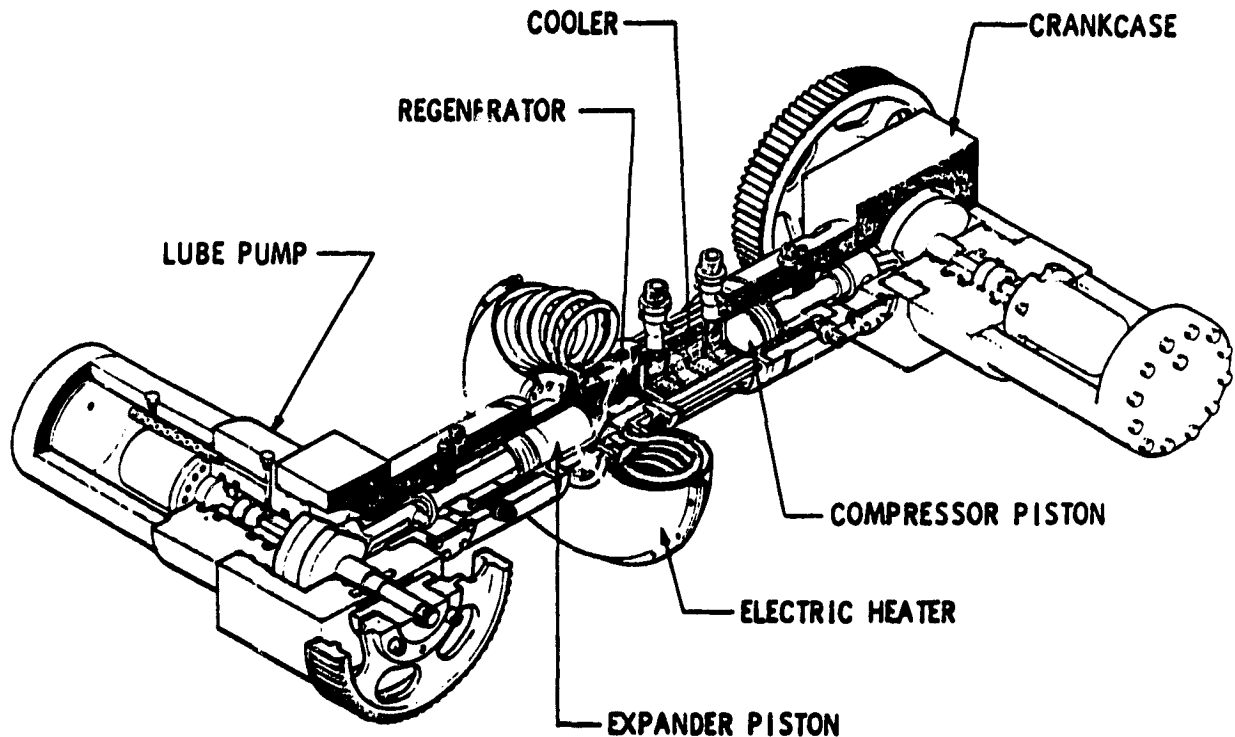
A Single-Acting Stirling Engine Configuration Showing Basic Components
